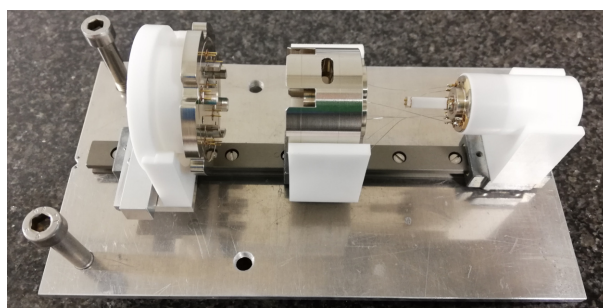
Assembly rail with the fixated and mutually centered container lid, STM body (version 3) and inner STM.
